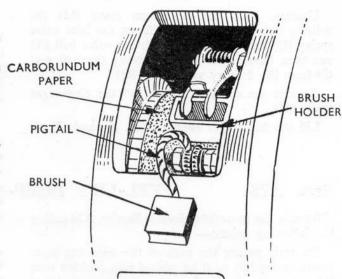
Method of "bedding" dynamo and starter motor brushes.
